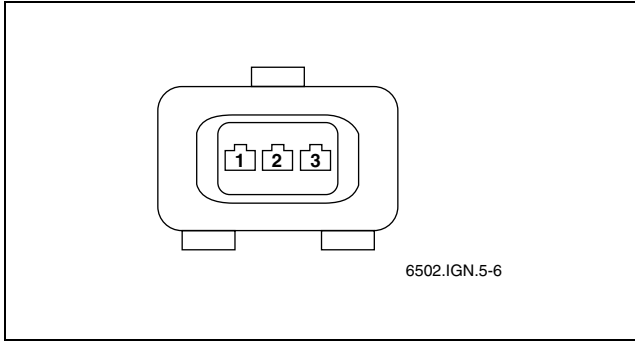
Crankshaft position/rpm sensor connector (arrow).
